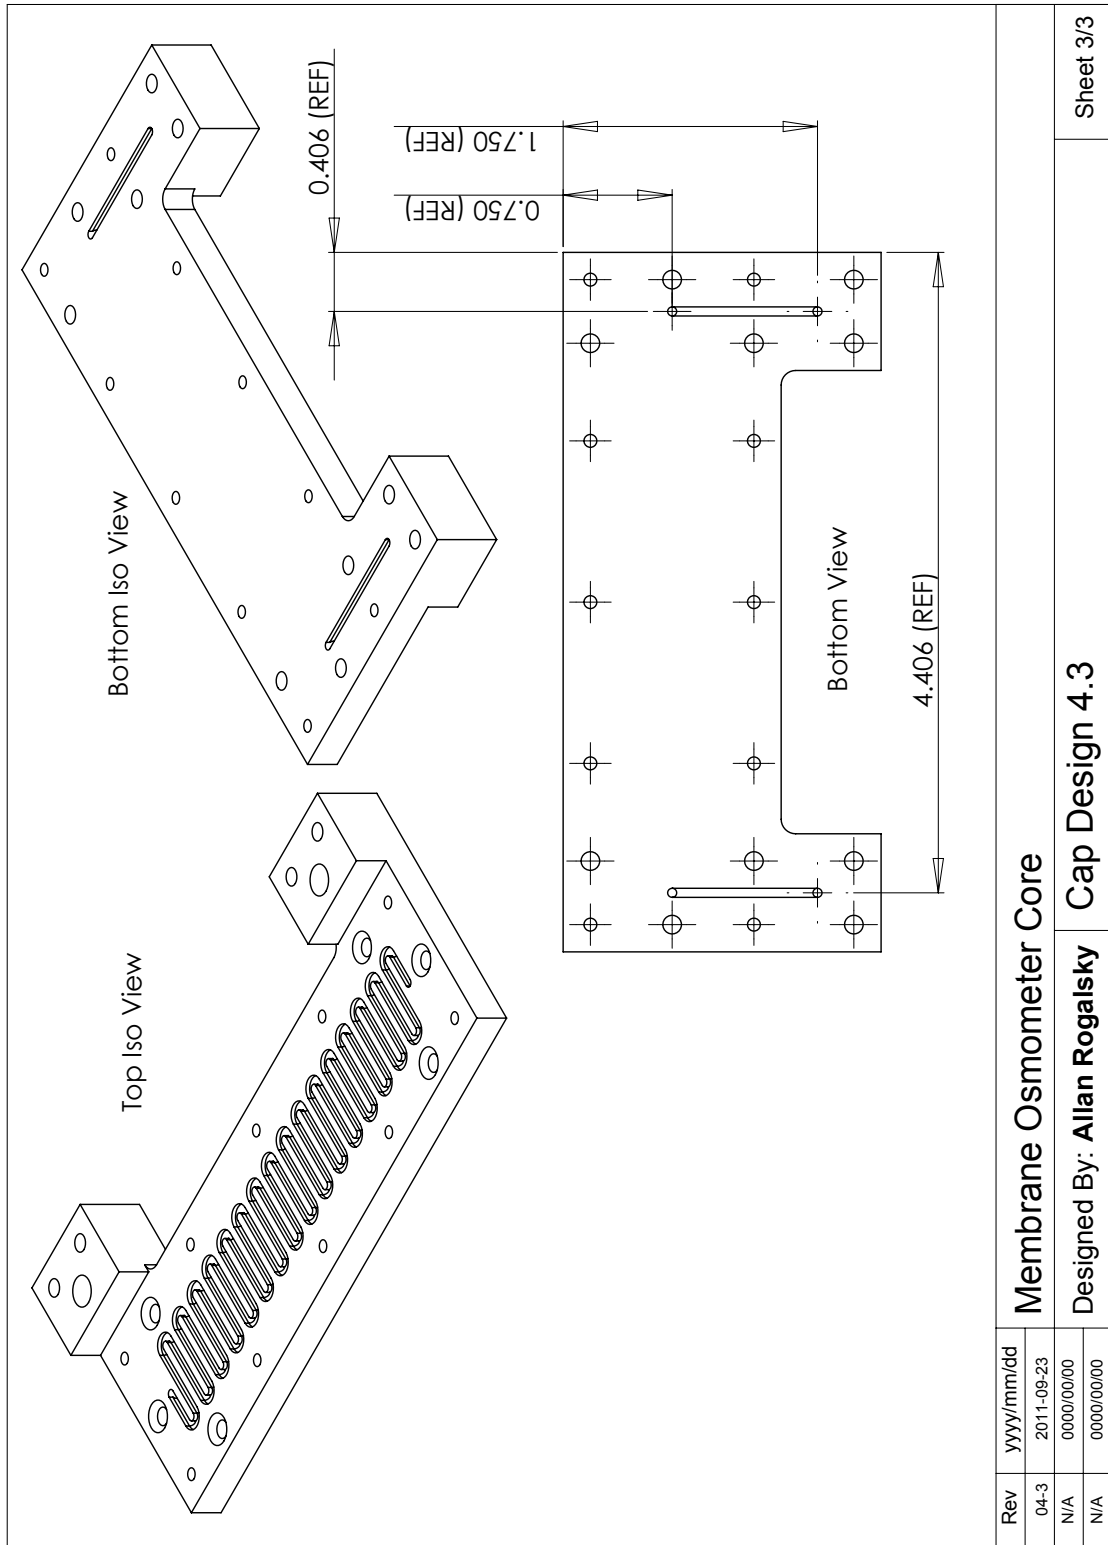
Osmometer Top Level 4.0 / Core Assembly / Cap / Sheet 3
